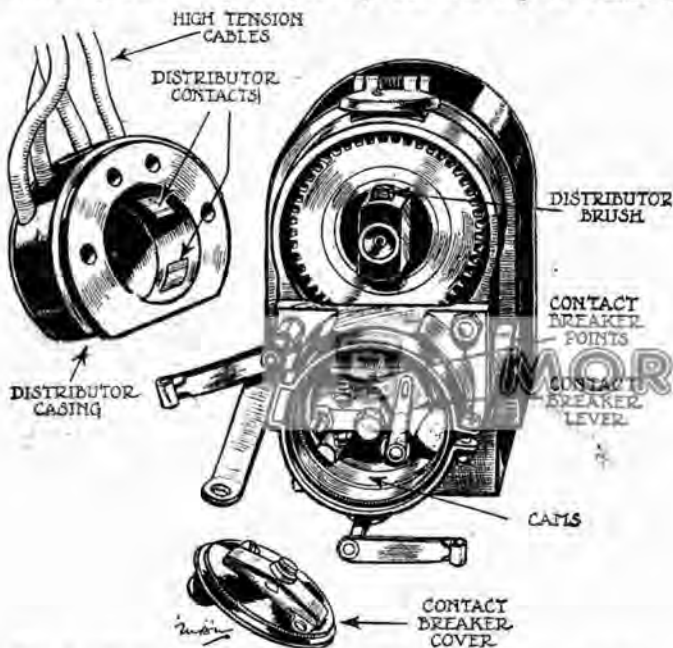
Contact breaker and distributor of the Lucas magneto.
